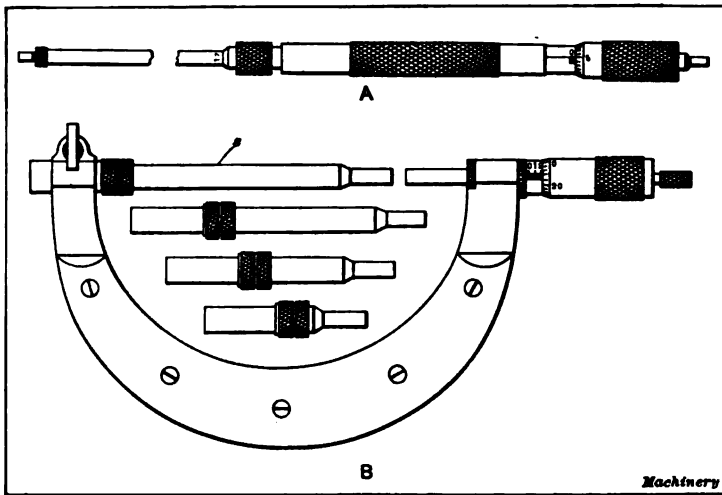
(A) Inside Micrometer Gage for Large Holes
